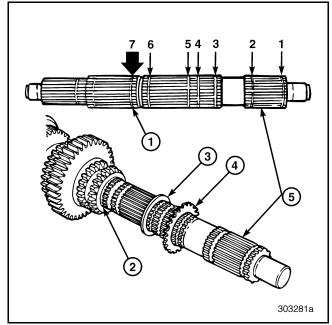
Removing Internal- and External-Toothed Thrust Washers and Snap Ring (T313L/T318L Shown)
